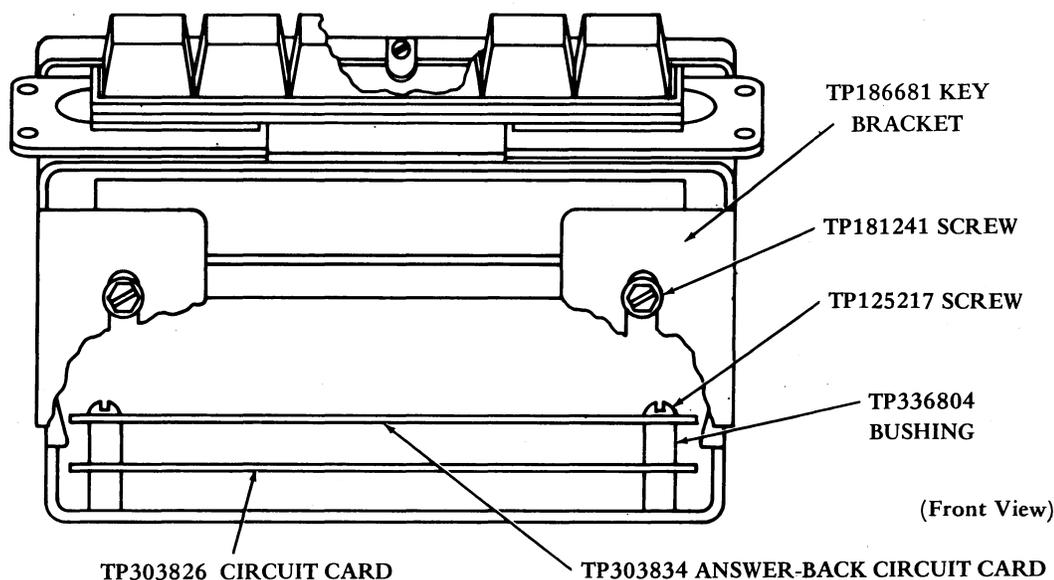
Mounting of Answer-Back on Set Logic Assembly
